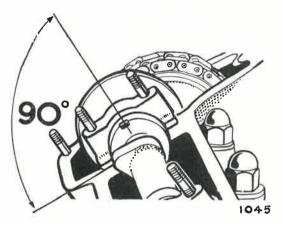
The keyway in the front bearing flange of the camshaft must be perpendicular (at 90°) to the cover face before tightening down the camshaft bearing caps.
